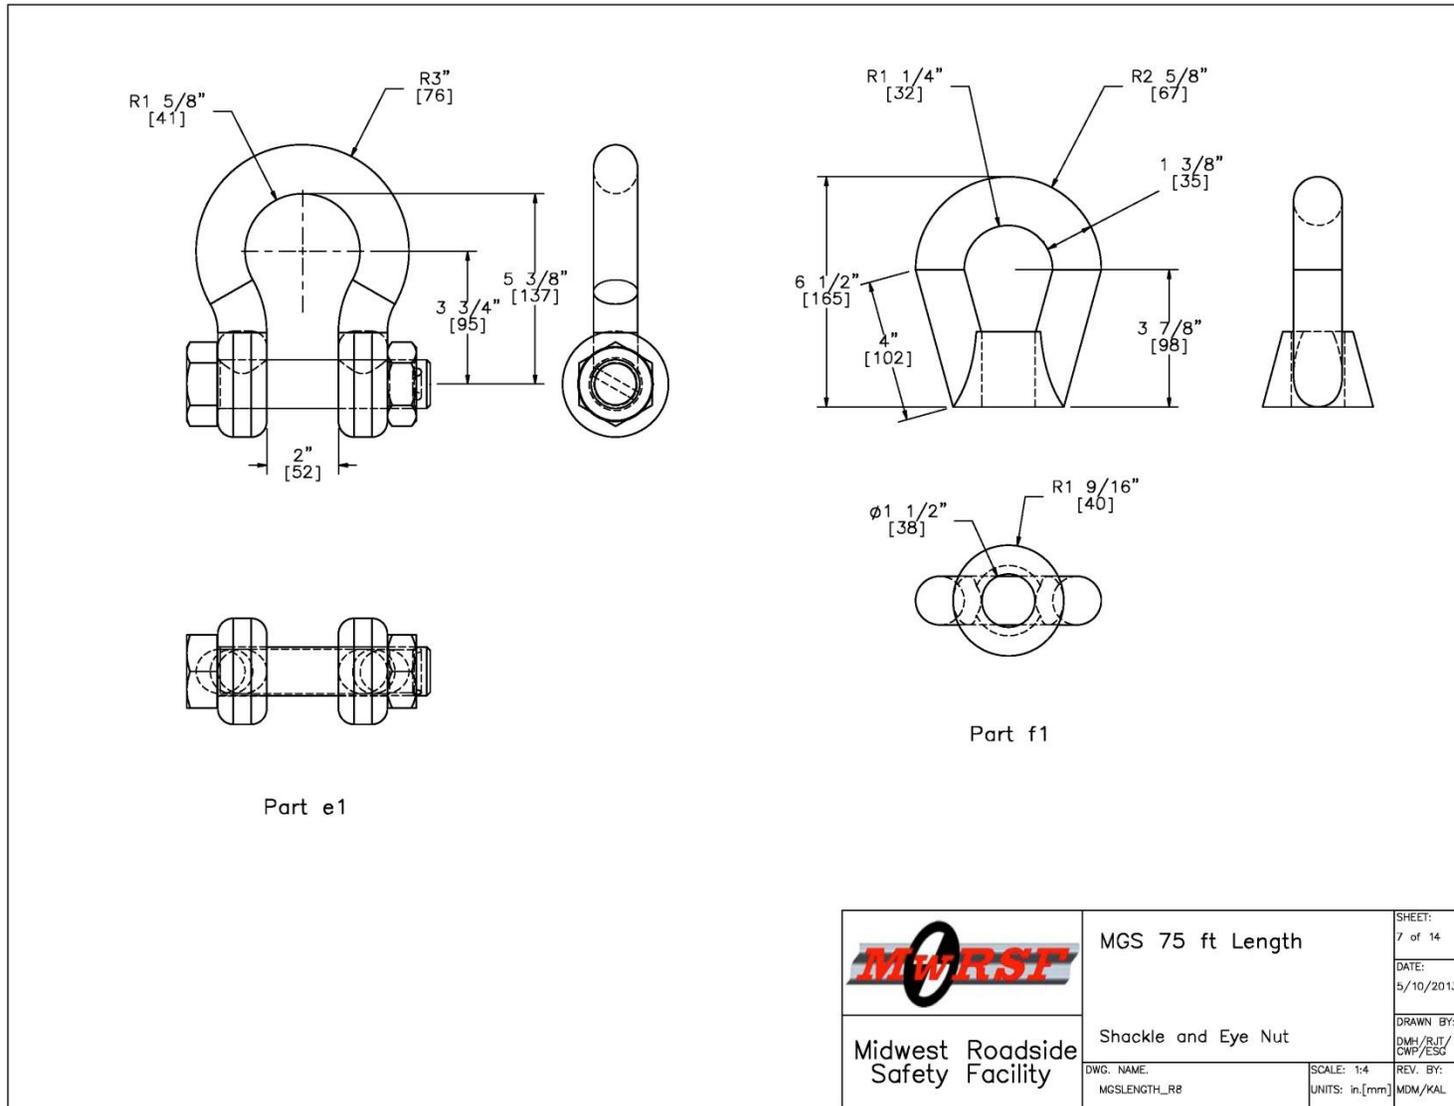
Shackle and Eye Nut Details, Test No. MGSMIN-1
